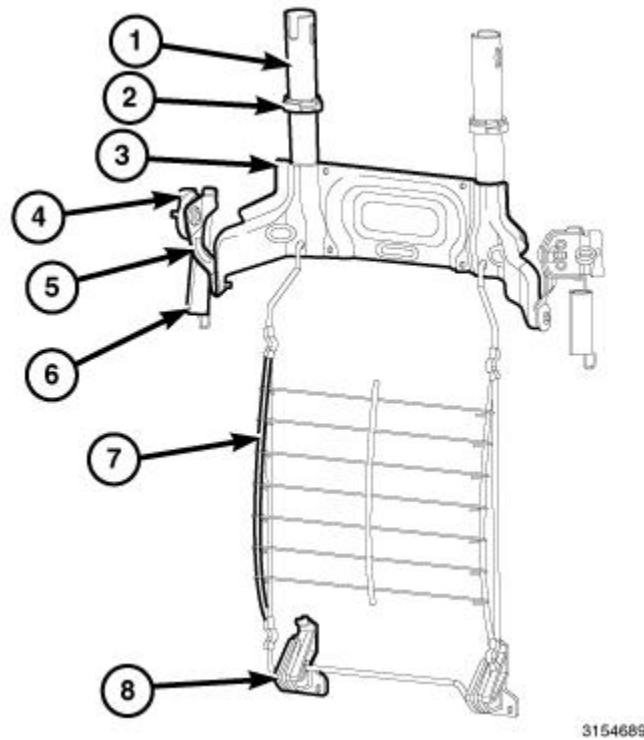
Steel Headrest Guide Tubes, Fulcrum Bushing, Brackets, Steel Pivot Link, Spring & Static Lumbar Assembly
